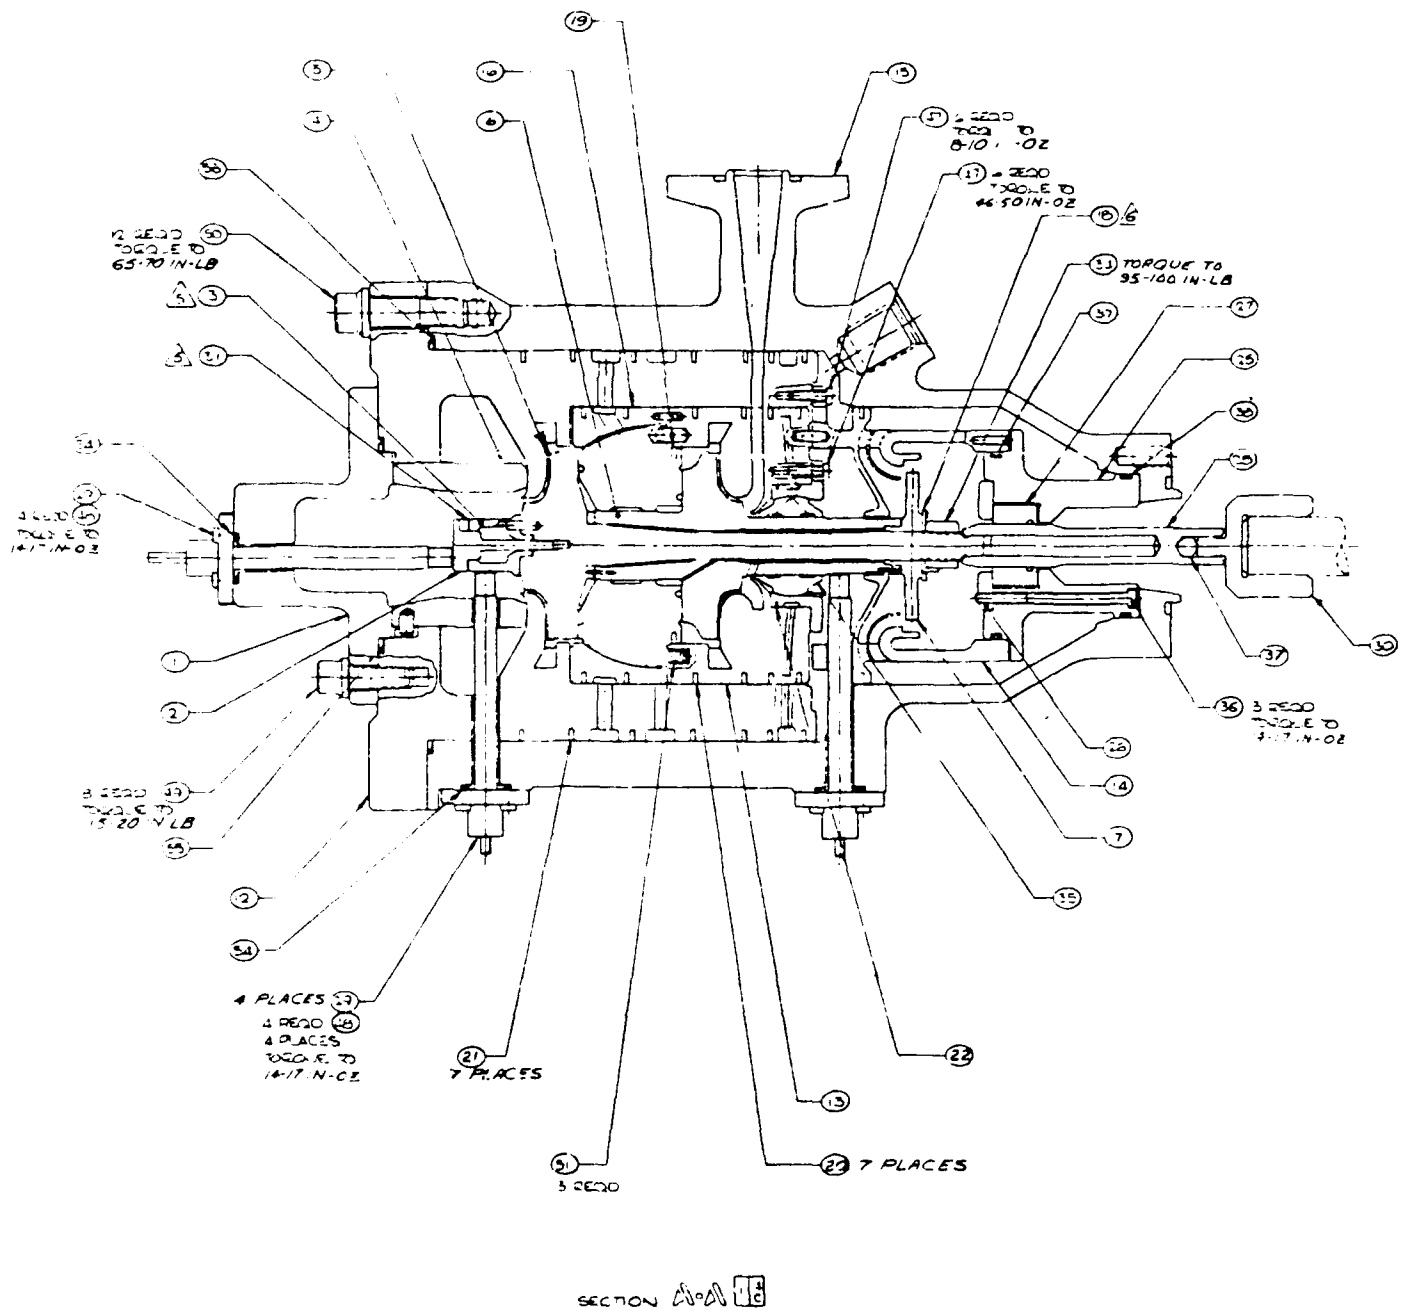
LOX Bearing Tester — OTV Turbopump
